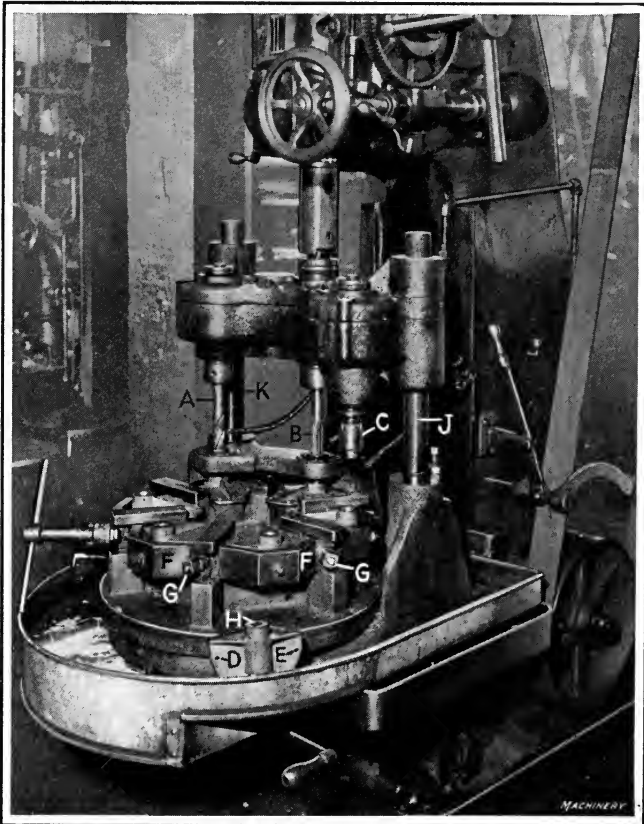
High-duty Drilling Machine equipped with Indexing Fixture and Special Three-spindle Head for Drilling, Reaming, and Facing
